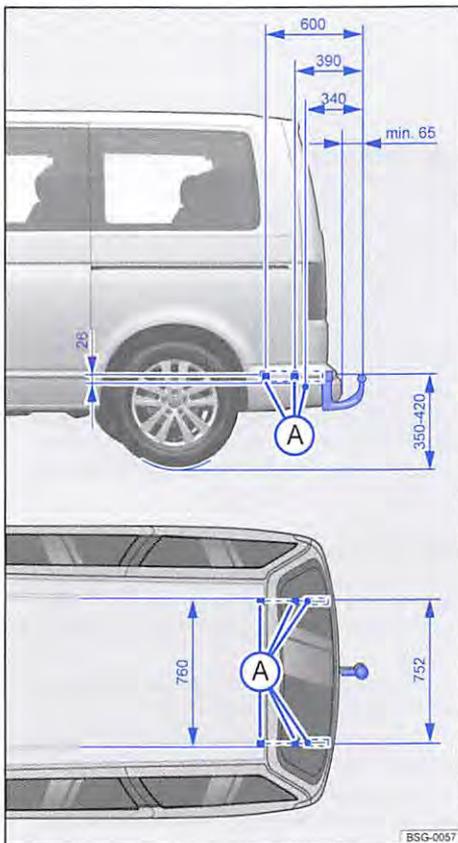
Dimensions and attachment points for retrofitting a towing bracket.
